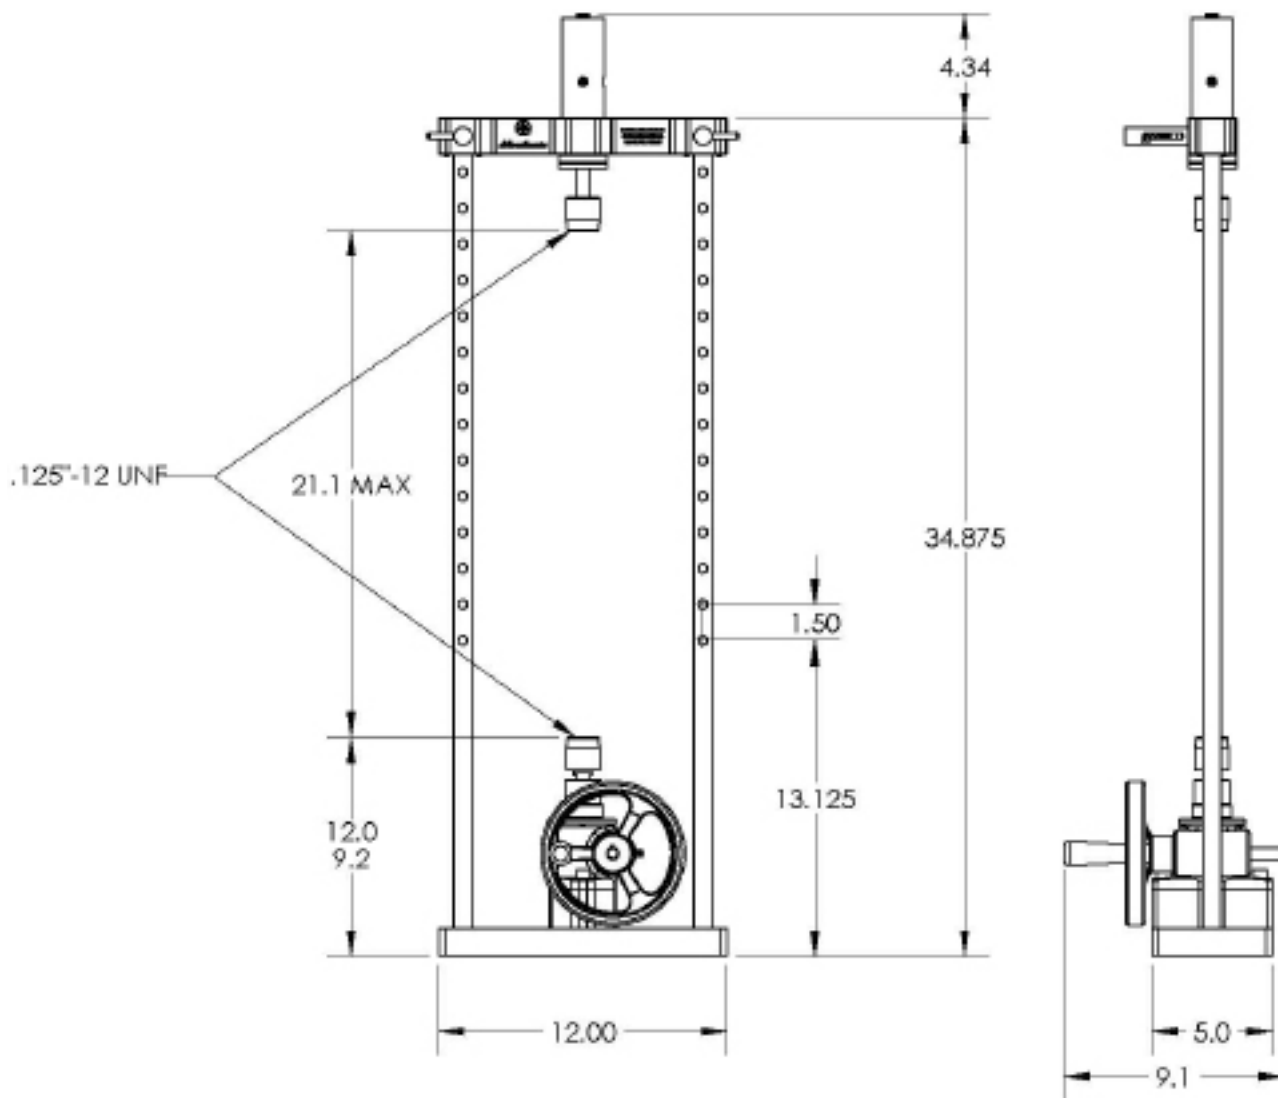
Dimensions of Portable Calibrating Machine (Model: PCM-2MD-02)
